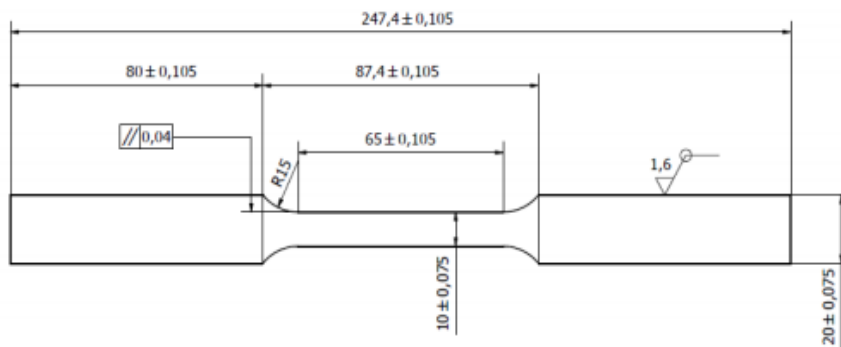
Geometry of the samples subjected to accelerated corrosion and fatigue tests
